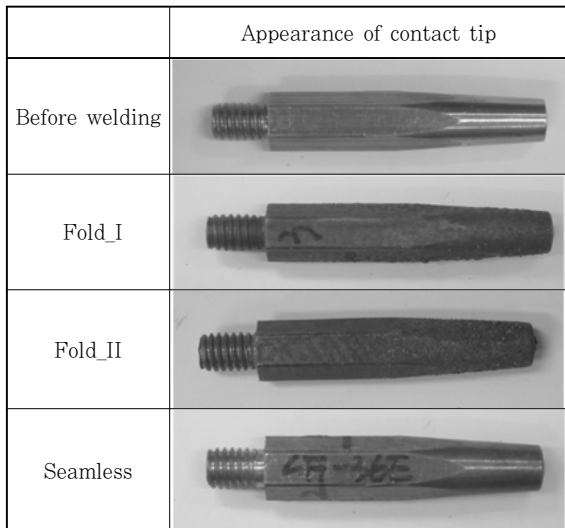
The Ware shape of contact tip according to welding times
